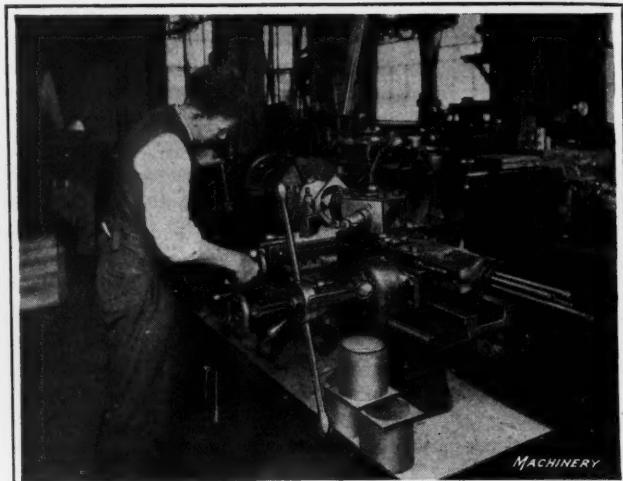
A Turret Lathe Operator with a Few Weeks' Training
